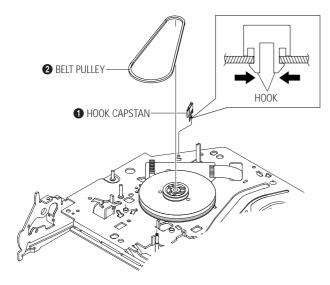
Hook Capstan, Belt Pulley Removal
